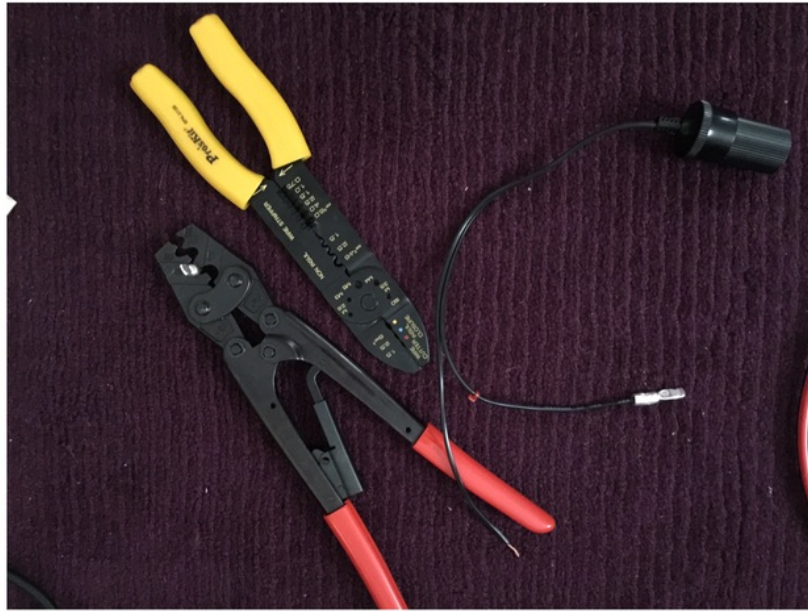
non-insulated crimper and 8 setting crimper, wire stripper & cutter
